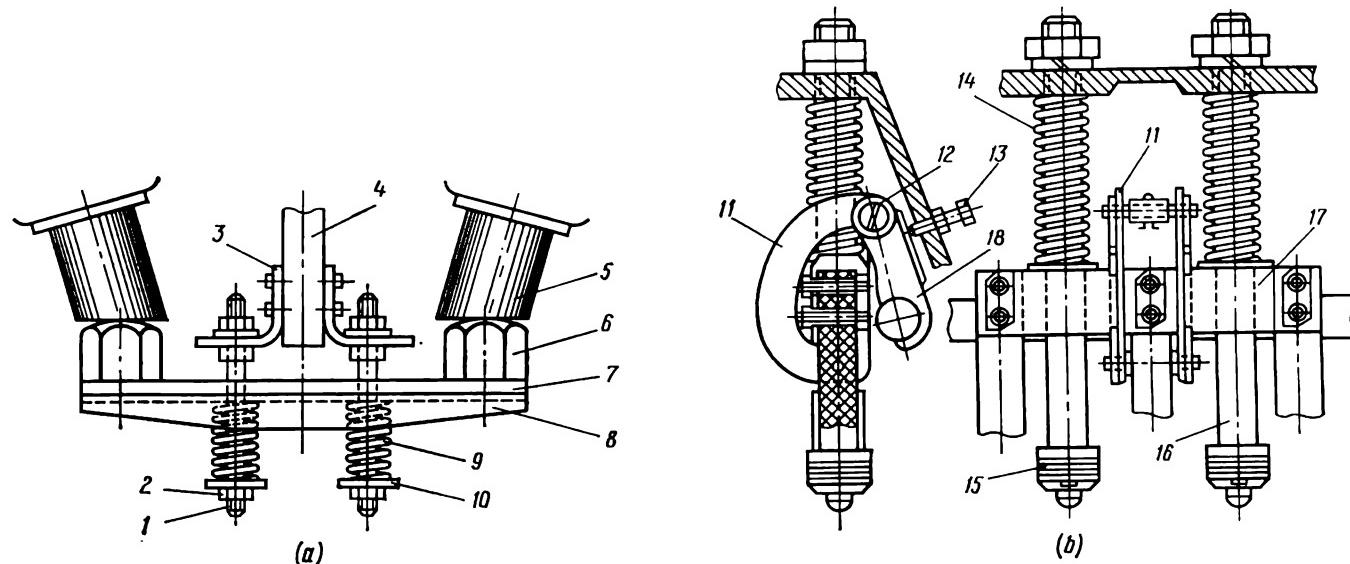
General arrangement of BMB-10 circuit breaker contact system and operating mechanism
